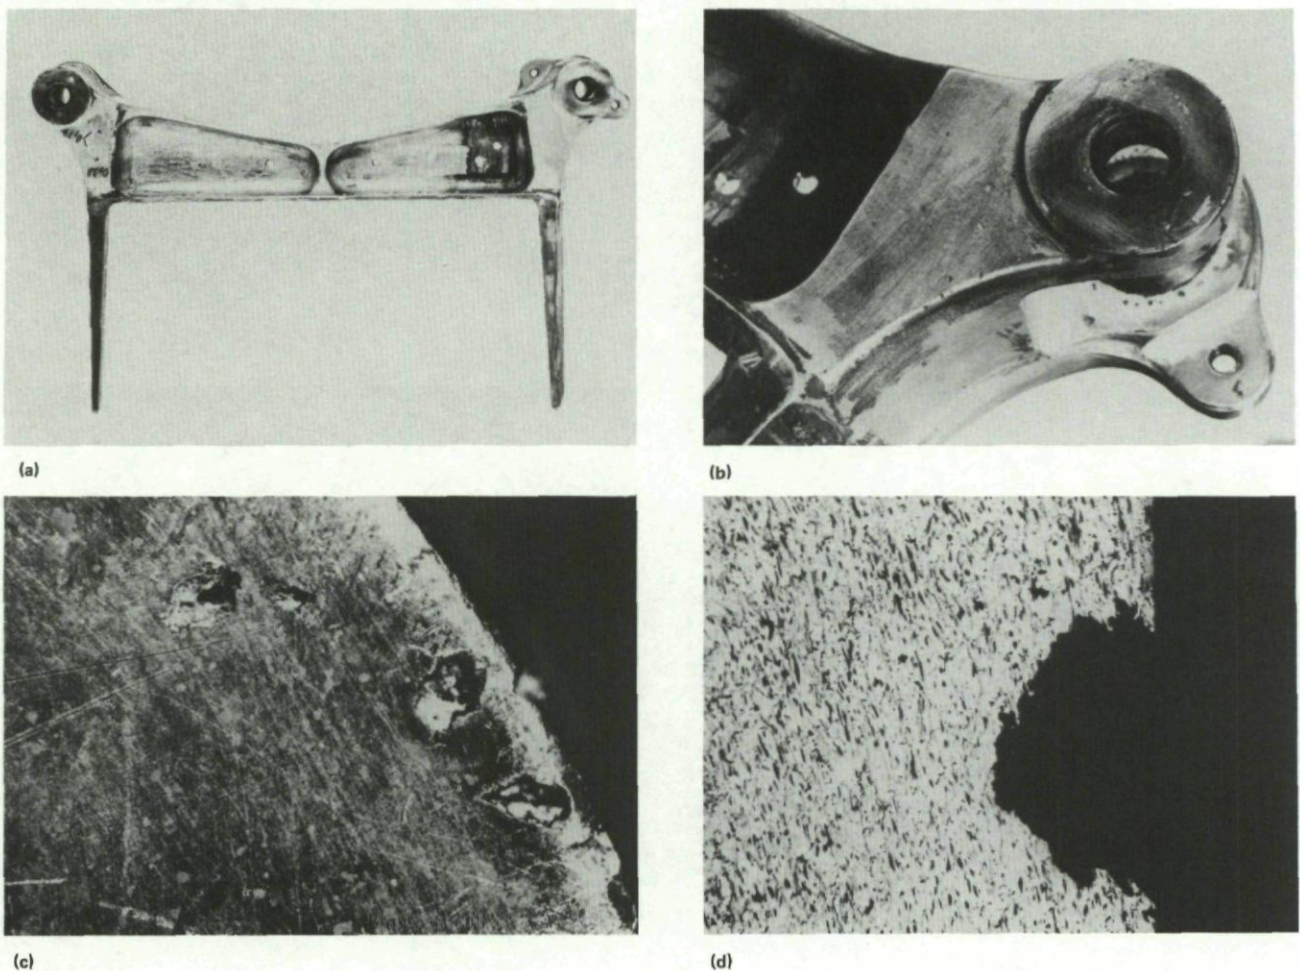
Pitting corrosion of a 7075 aluminium tail cone fitting
